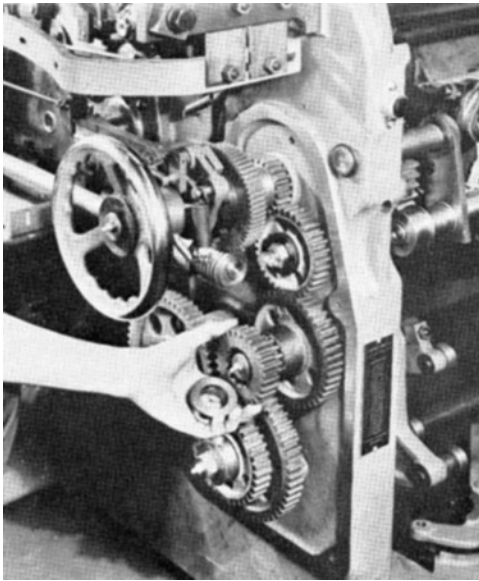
Example of change gears on a machine tool. (Courtesy of Warner & Swansea Co., Cleveland, Ohio.)
